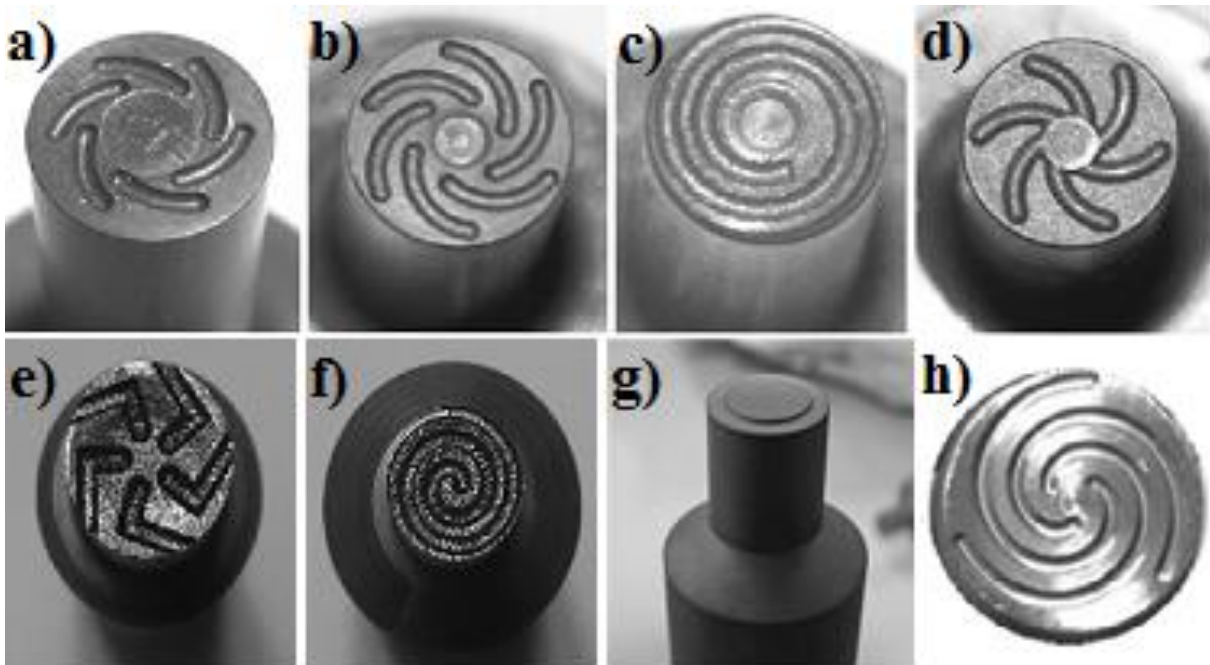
The different pin-less tool designs compared: (a) the short flute wiper tool [20]; (b) the long flute wiper tool [20]; (c) the fluted scroll tool [20]; (d) the proud wiper tool [20]; (e) the tool with scrolled groove [57]; (f) the tool with L-shaped grooves [57]; (g) cylindrical tool with projection [59]; (h) tool with involute grooves [19]
